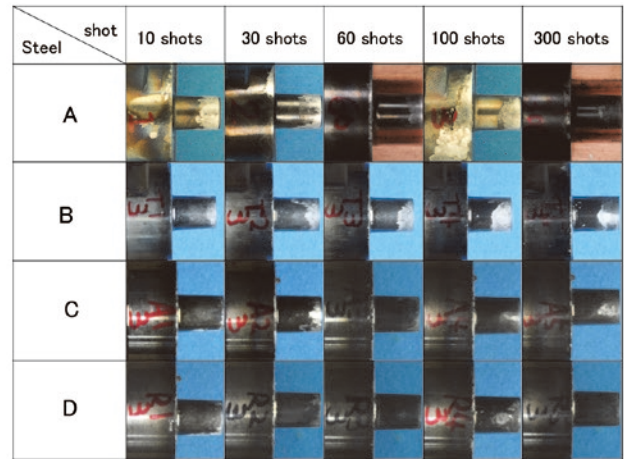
Outside of test pieces after Al melting test (Opposite sprue side).
